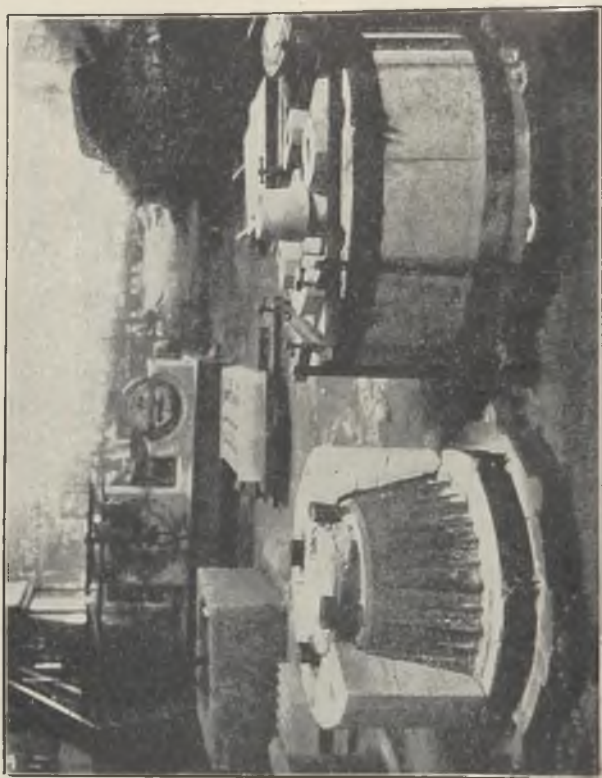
MANGANESE-STEEL CRUSHER MOULD READY FOR CASTING AND PARTIALLY STRIPPED.
